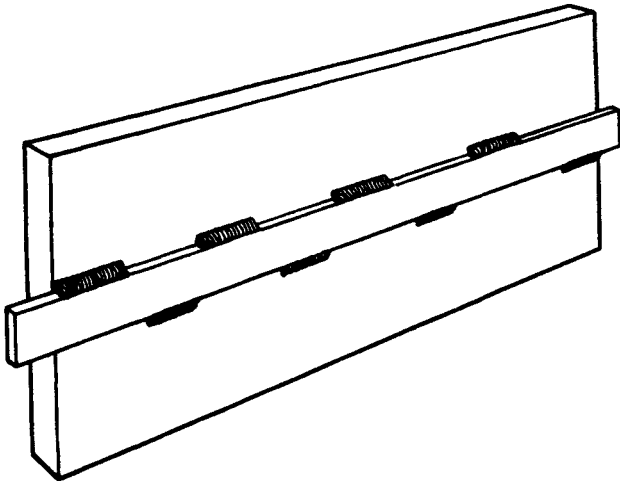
Short, intermittent tack welds should be used to hold the backup strip in place. (*The Lincoln Electric Company.*)
